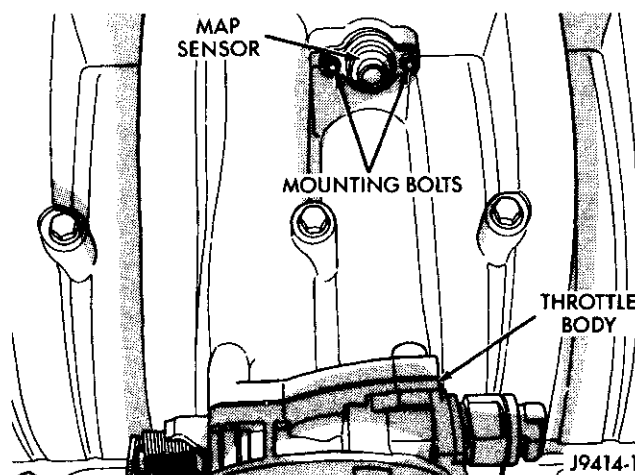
MAP Sensor Location—8.0L V-10 Engine—Typical
